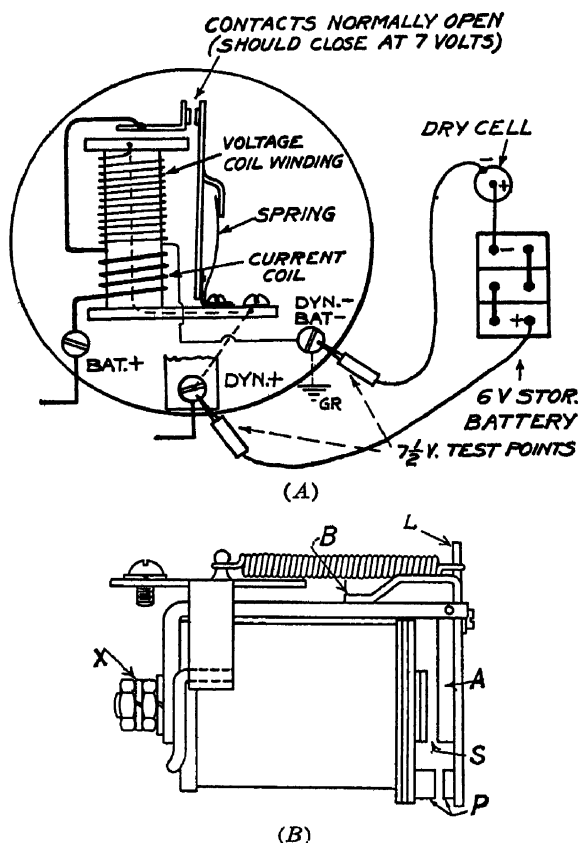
(A) Shop method of adjusting cutout to close at proper voltage. (B) The Delco cutout relay—illustrating adjustments.
